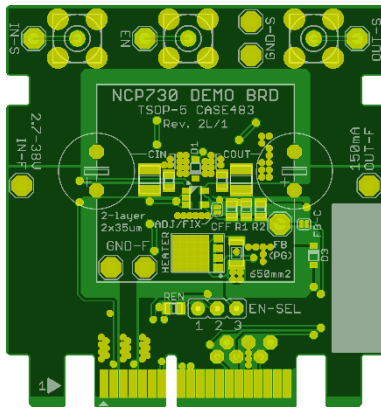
NCP730 Demo Board (2 layer, rev. 1) – PCB Top Layer
